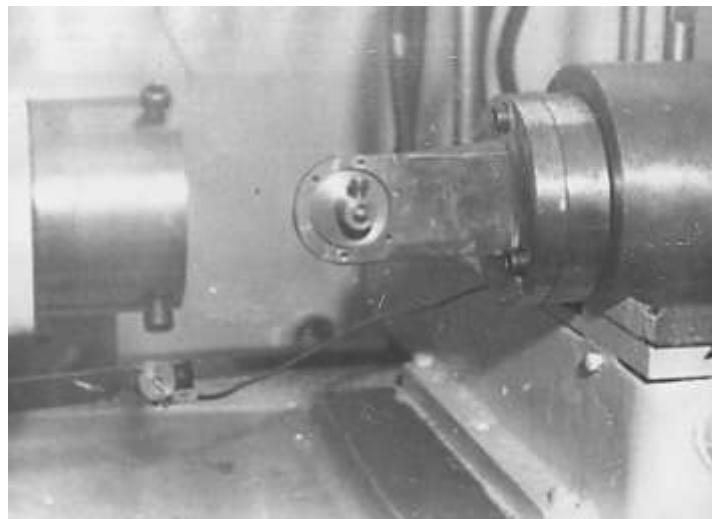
Bracket with ultrasonic piezovibrator mounted on diamond boring machine
